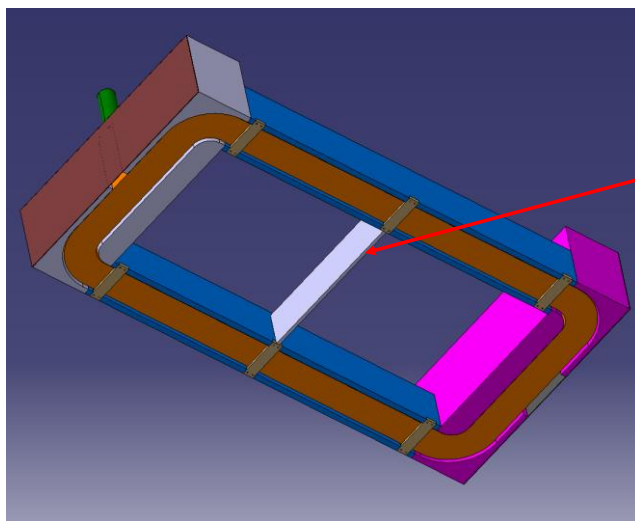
Bottom view of coil former, showing magnet channel and supply tube
